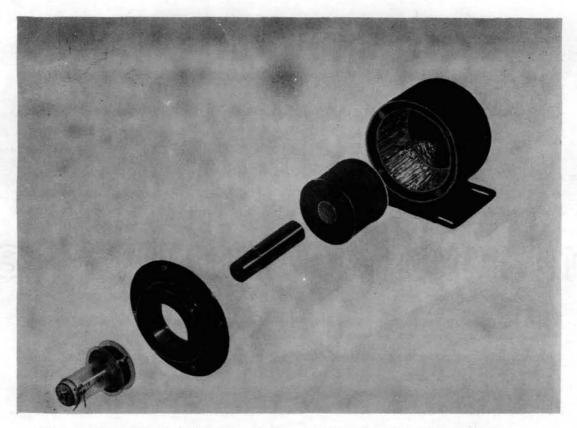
Exploded View of Concentric Oscillating Electromagnetic Generator.
